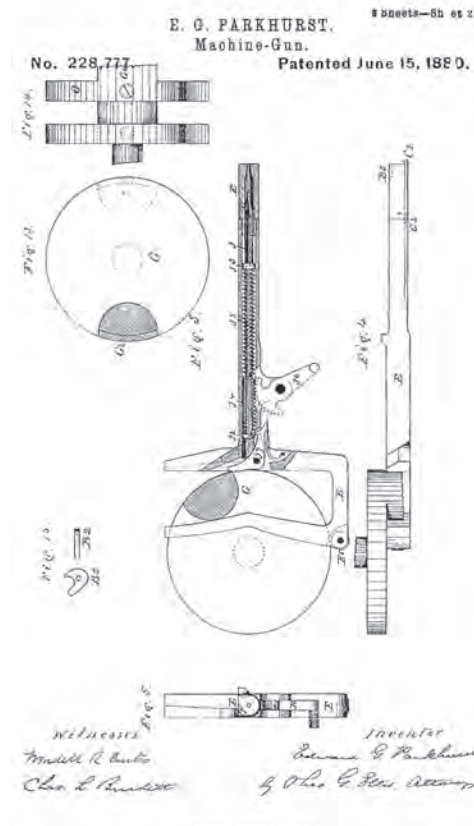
Crankshaft, cam bolt, and firing mechanism of the Improved Gardner Gun. Photo credit: Author's library.
